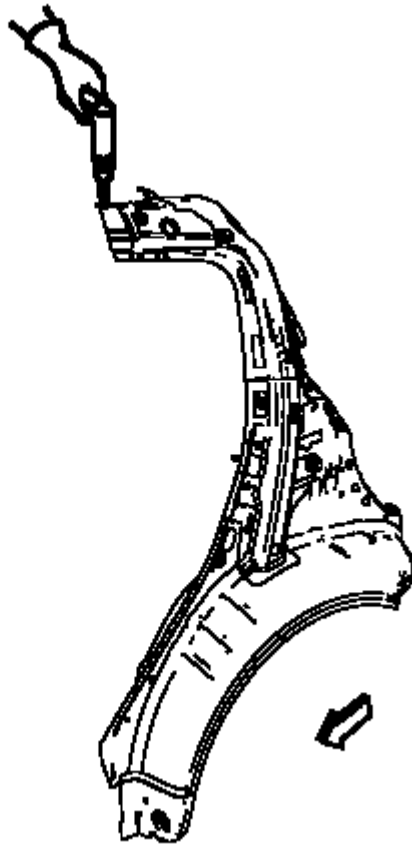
Drilling 8 Mm (5/16 In) For Plug Welding Along Edges Of Service Panel
